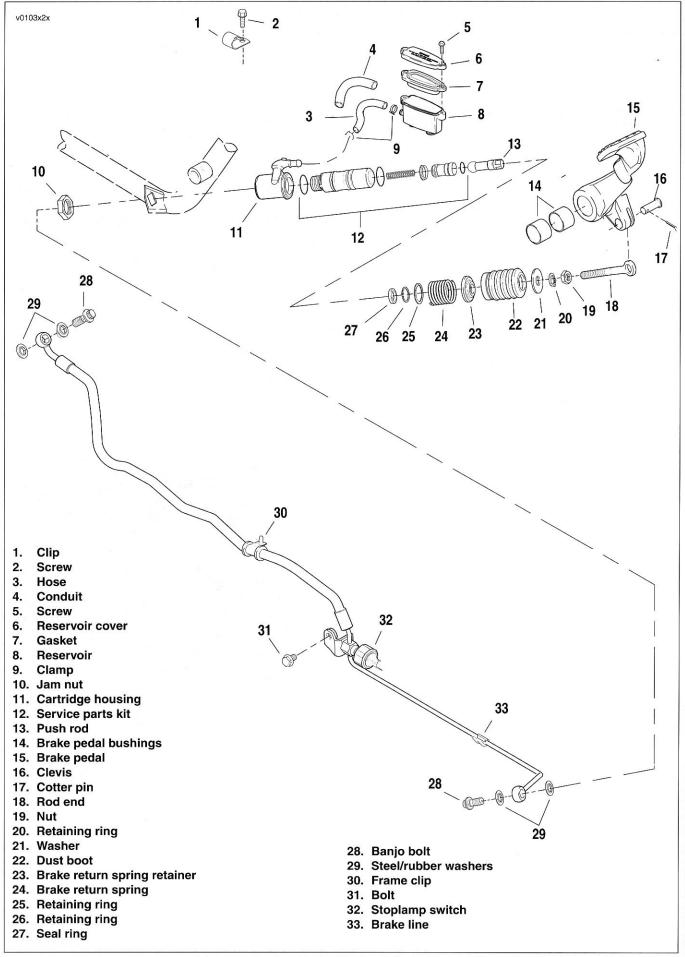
Rear Brake Master Cylinder/Reservoir
